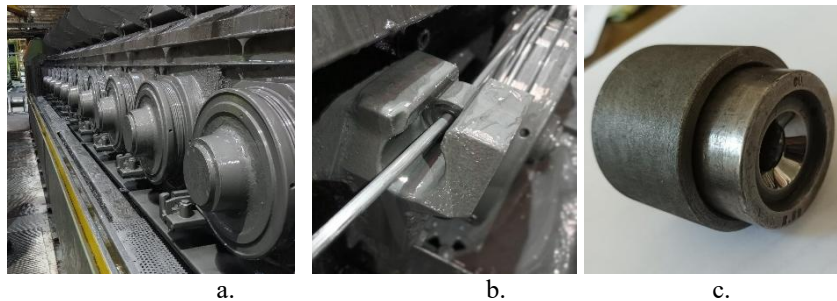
The process of obtaining wires by drawing; (a) wire drawing machine; (b) positioning a die on the wire drawing machine; (c) wire drawing die
